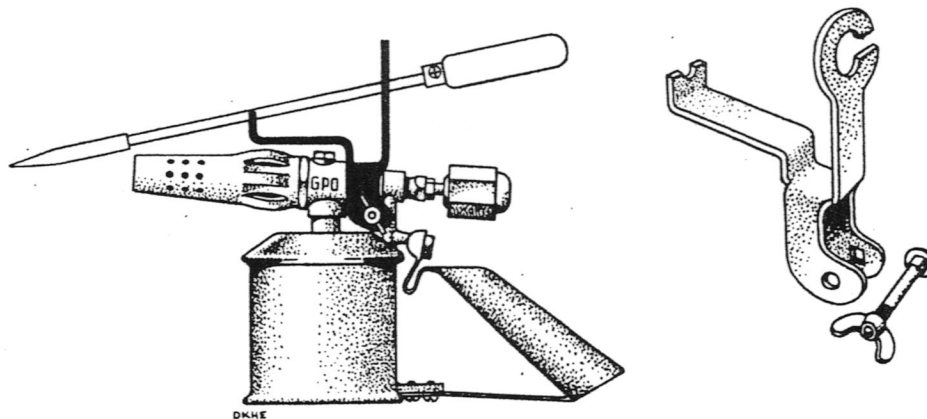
SUPPORT FOR SOLDERING IRONS
